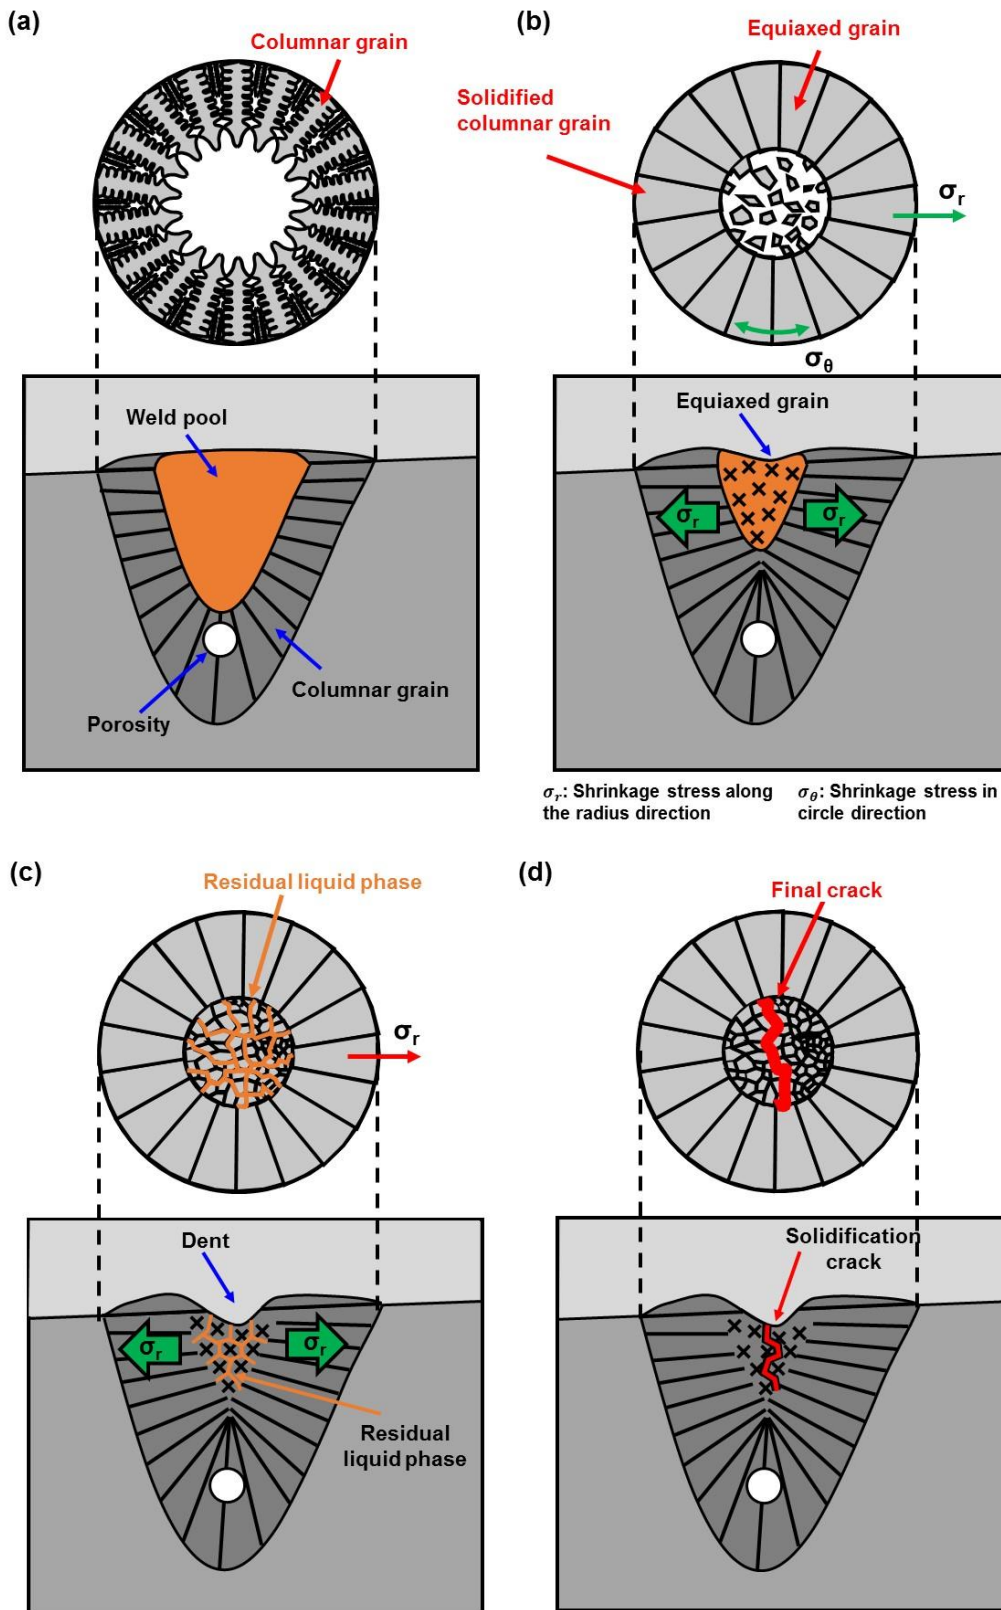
Schematic illustration for hot crack propagation of surface and cross section of laser spot welding with A5083.
